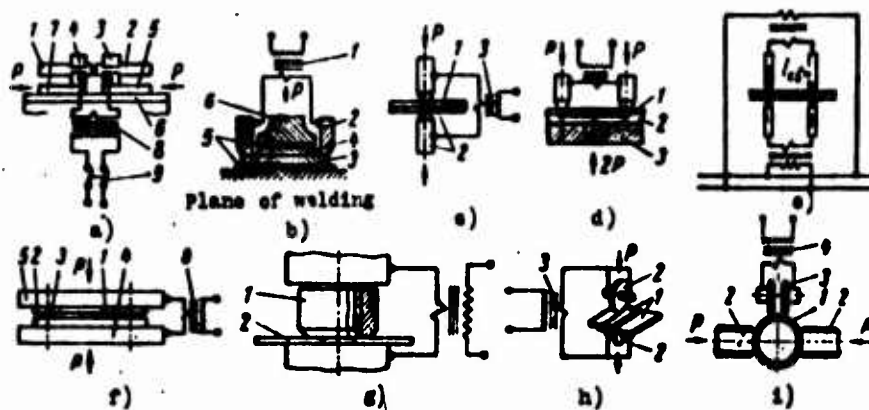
Diagram of the most important methods of contact welding.
